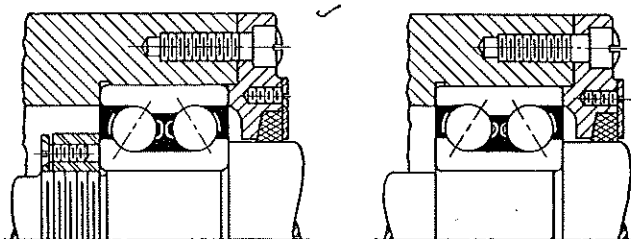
Ball bearing mountings. Courtesy New Departure Division of General Motors.
